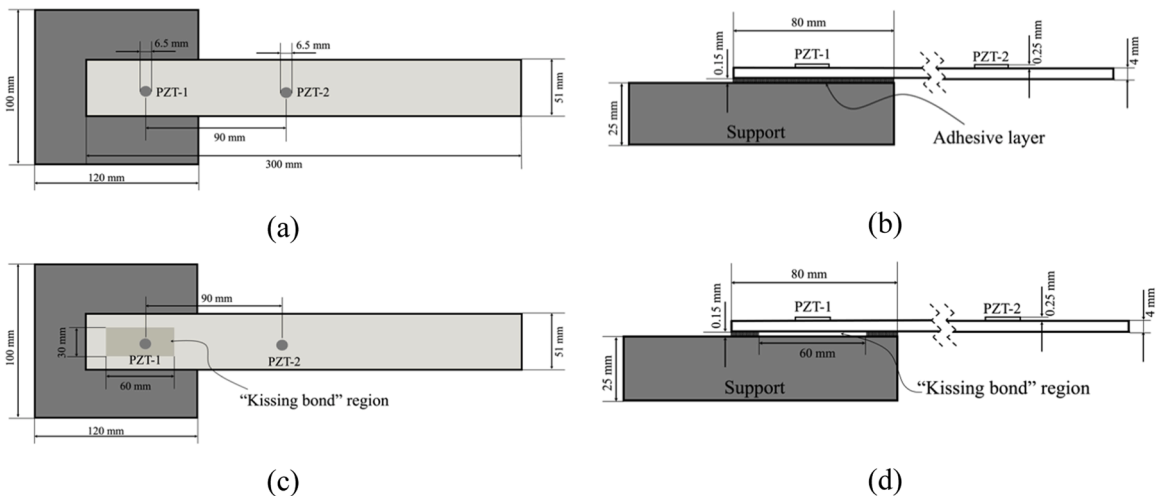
Illustrations of adhesively bonded specimens. Top (a) and side (b) views of the perfectly bonded joint sample, and top (c) and side (d) views of the joint specimen with KB.
